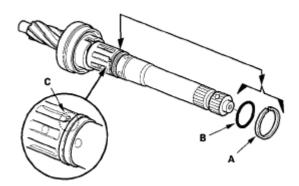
Removing External Snap Ring And Sleeve From Pinion Shaft Courtesy of AMERICAN HONDA MOTOR CO., INC.
